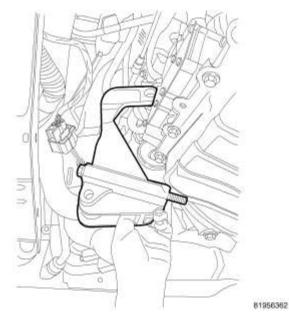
Identifying Bracket For Mount Courtesy of CHRYSLER LLC
